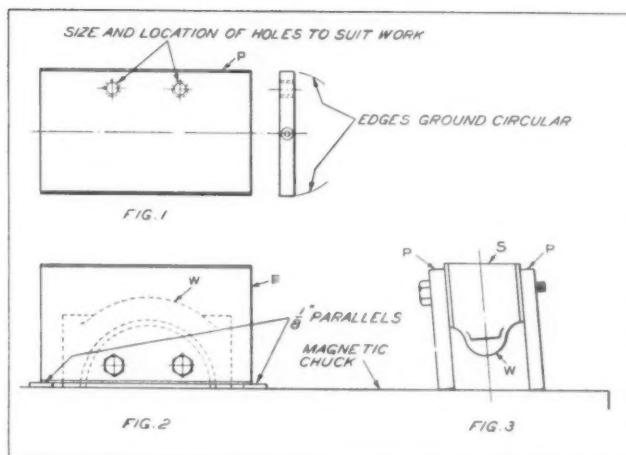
Cylindrical-edged Parallel *P*. Fig. 2. Method of Setting up and Clamping Parallels *P* to Work *W*. Fig. 3. Work and Parallels Mounted on Magnetic Chuck for Grinding Surface *S* without Changing its Angular Position with Respect to Sides or Axis of Work
